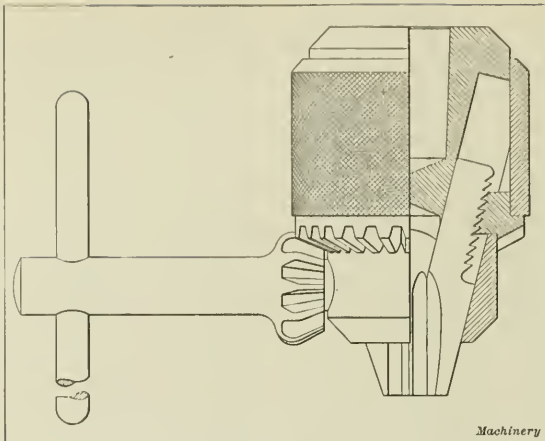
Geared Chuck with Nut Separate from Sleeve
